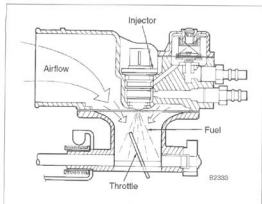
CFI delivers fuel directly above throttle plate, similar to carburetor location. (Low-pressure shown.)
